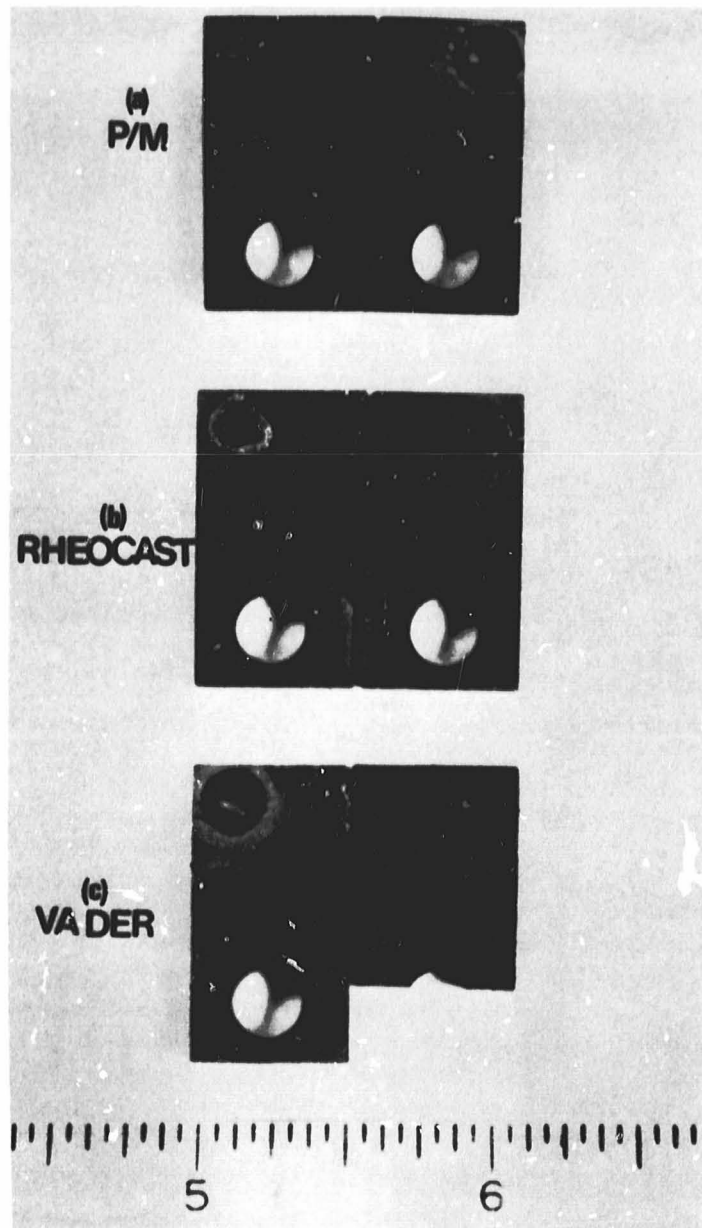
The macroscopic fracture appearance of the CT specimens. (a) P/M; (b) rheocast; (c) VADER process.
